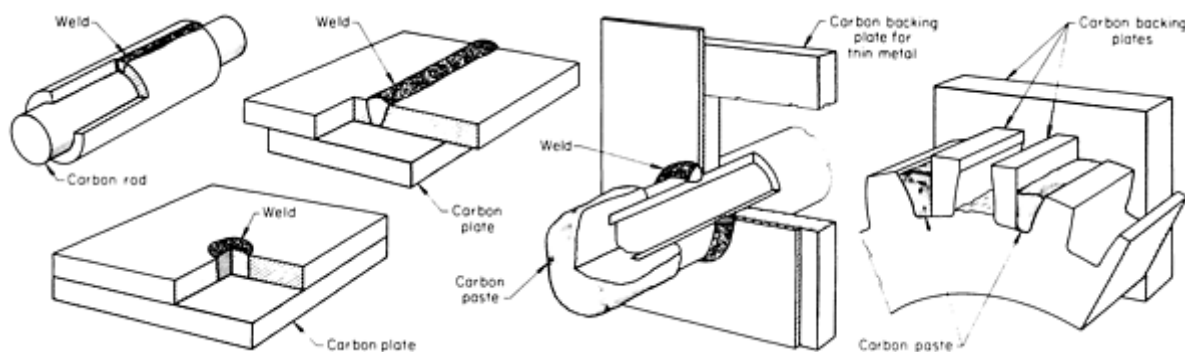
USE OF CARBON BACKING TO PROVIDE SUPPORT WHEN REPAIR WELDING SURFACES AND CONTOURS
